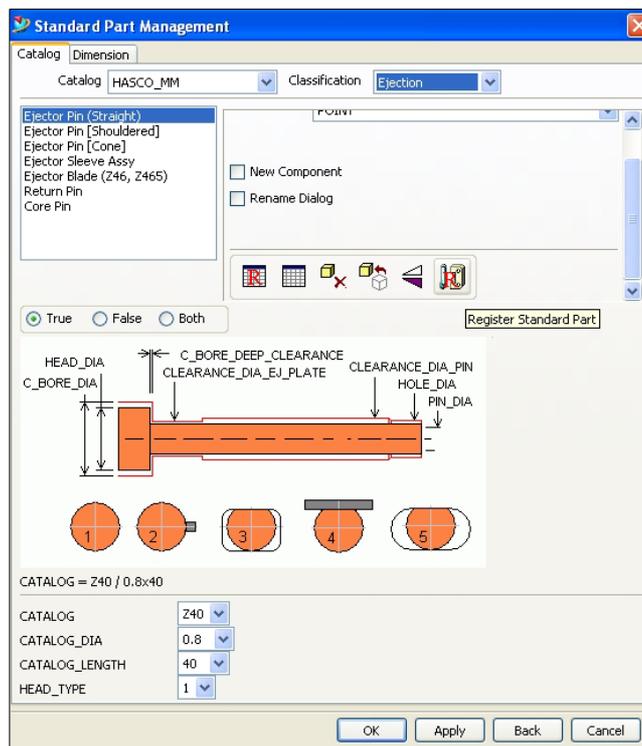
One of NX4 Mold Wizard standard parts library dialog boxes
